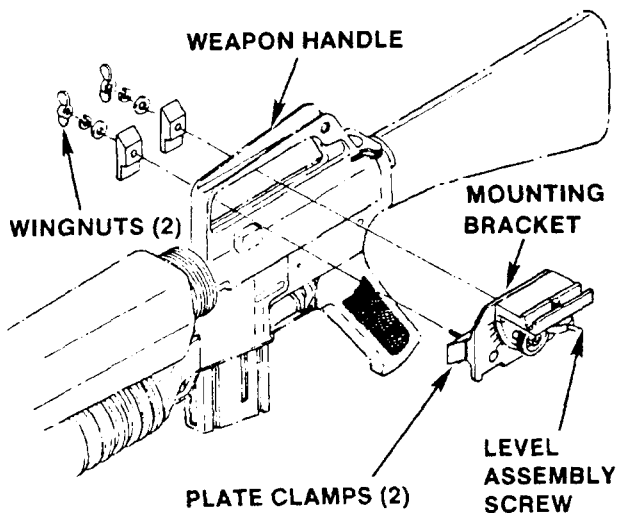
Installation of Mounting Bracket Assembly, M203.
